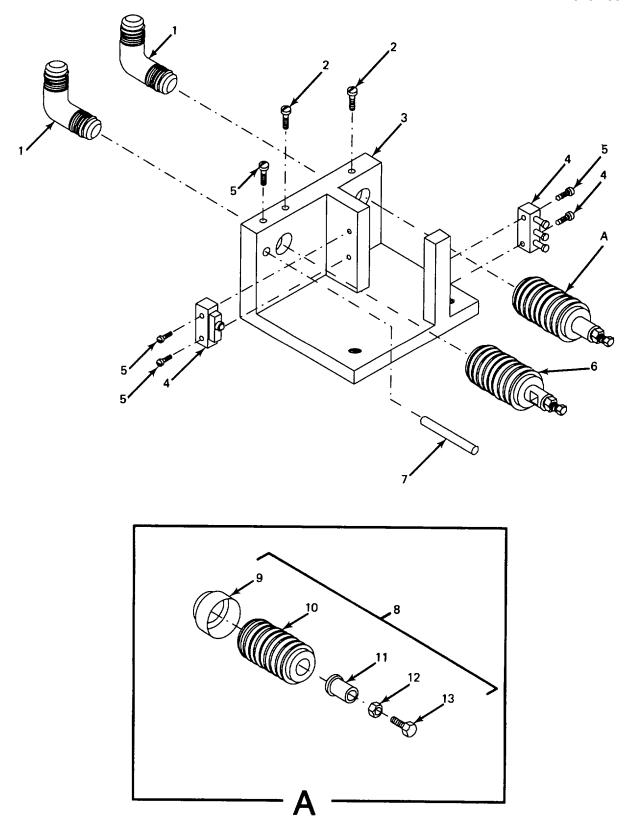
BELLOWS BLOCK ASSEMBLY (92-0006) C-40
